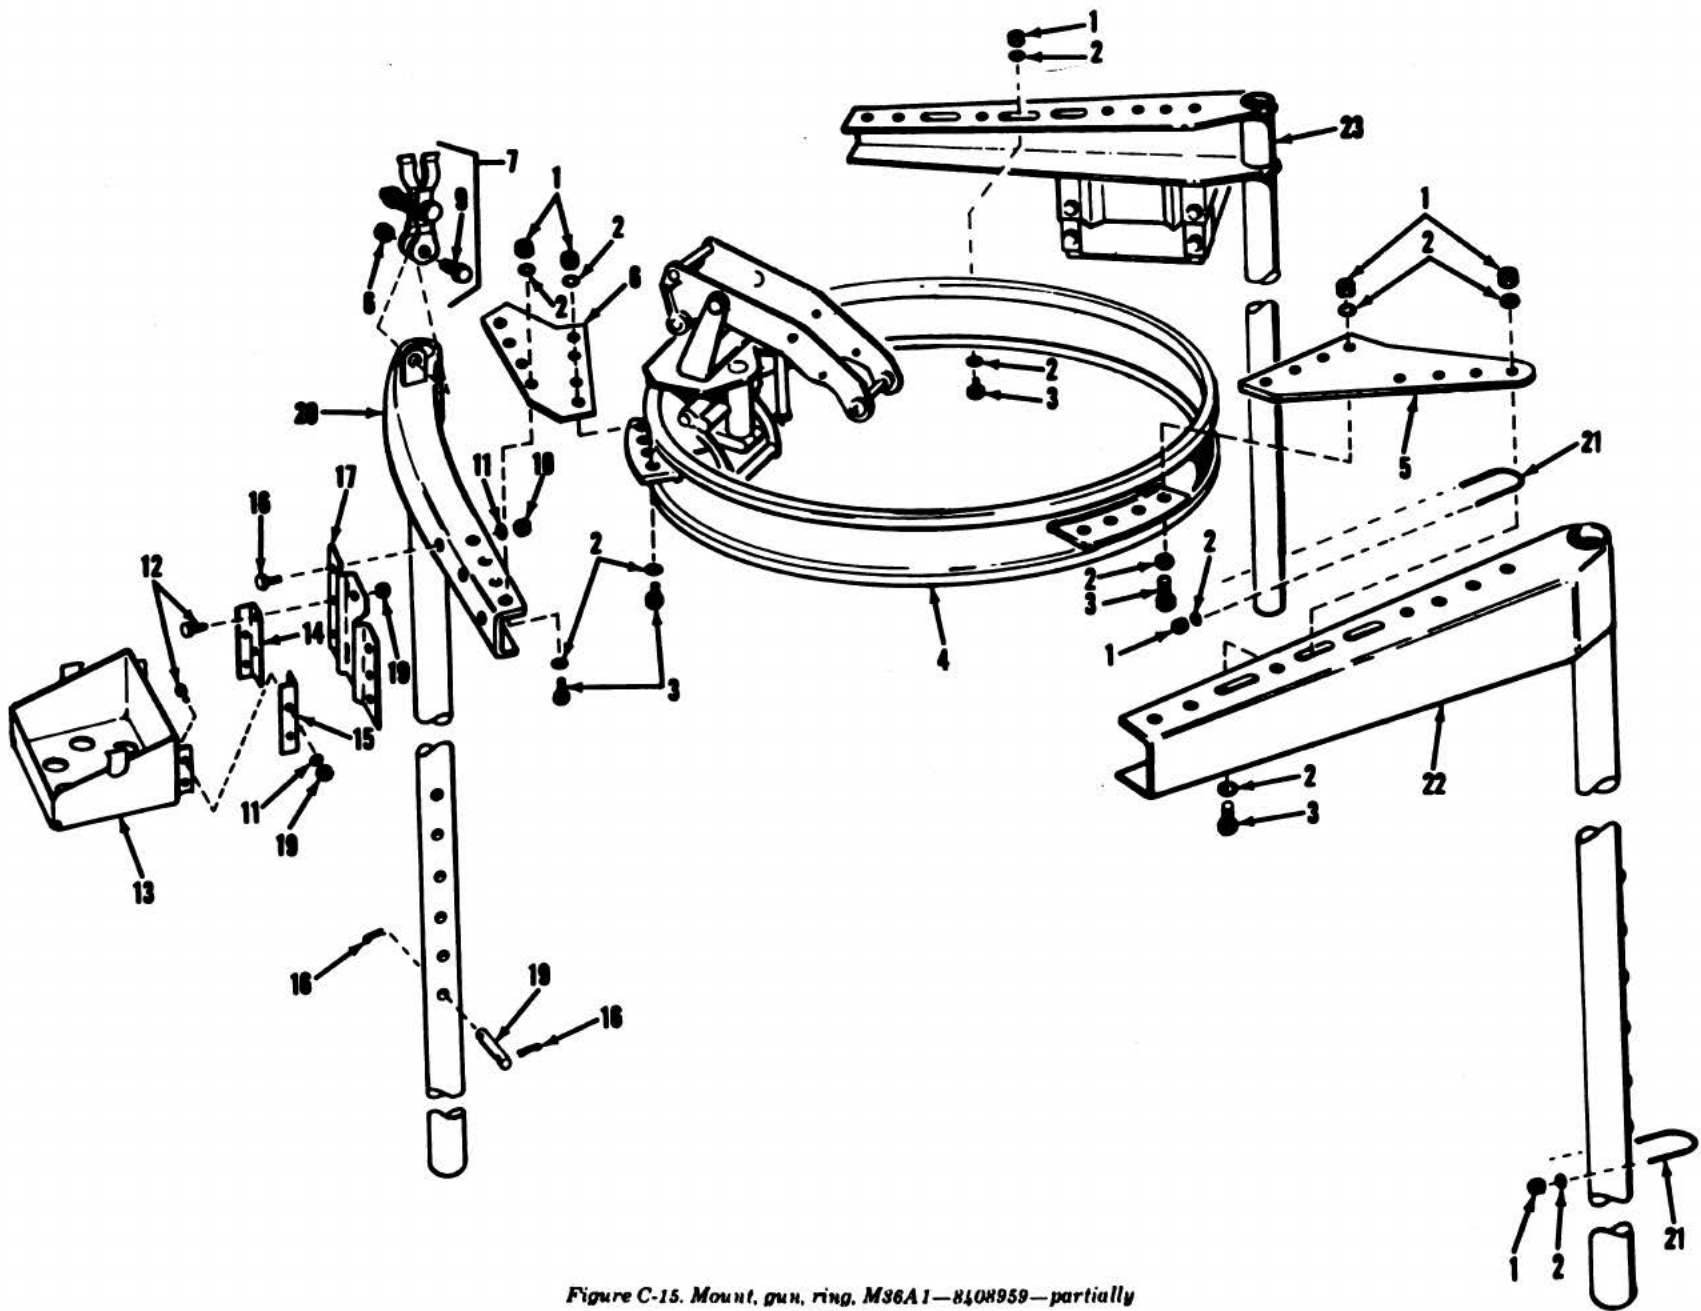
Mount, gun, ring, M36A1-8408959—partially exploded view.
